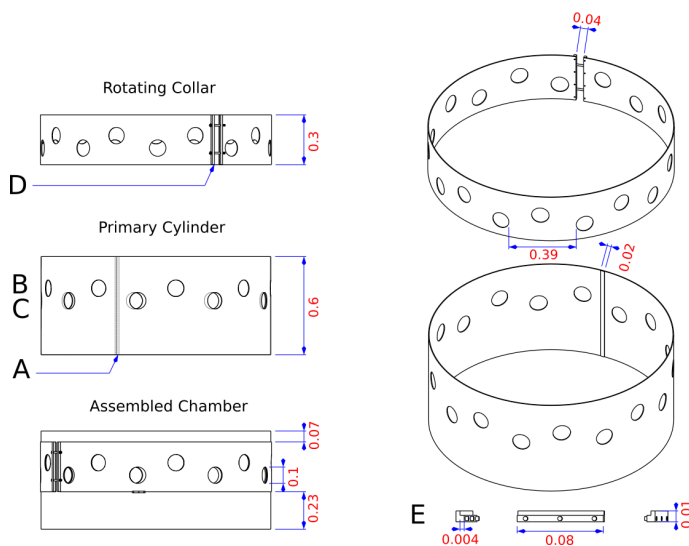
Mesocosm chamber technical diagram showing (a) the primary cylinder seam, (b) upper water exchange holes, (c) lower water exchange holes, (d) collar locking device, and (e) vertical alignment brackets. Labelled units are in metres
